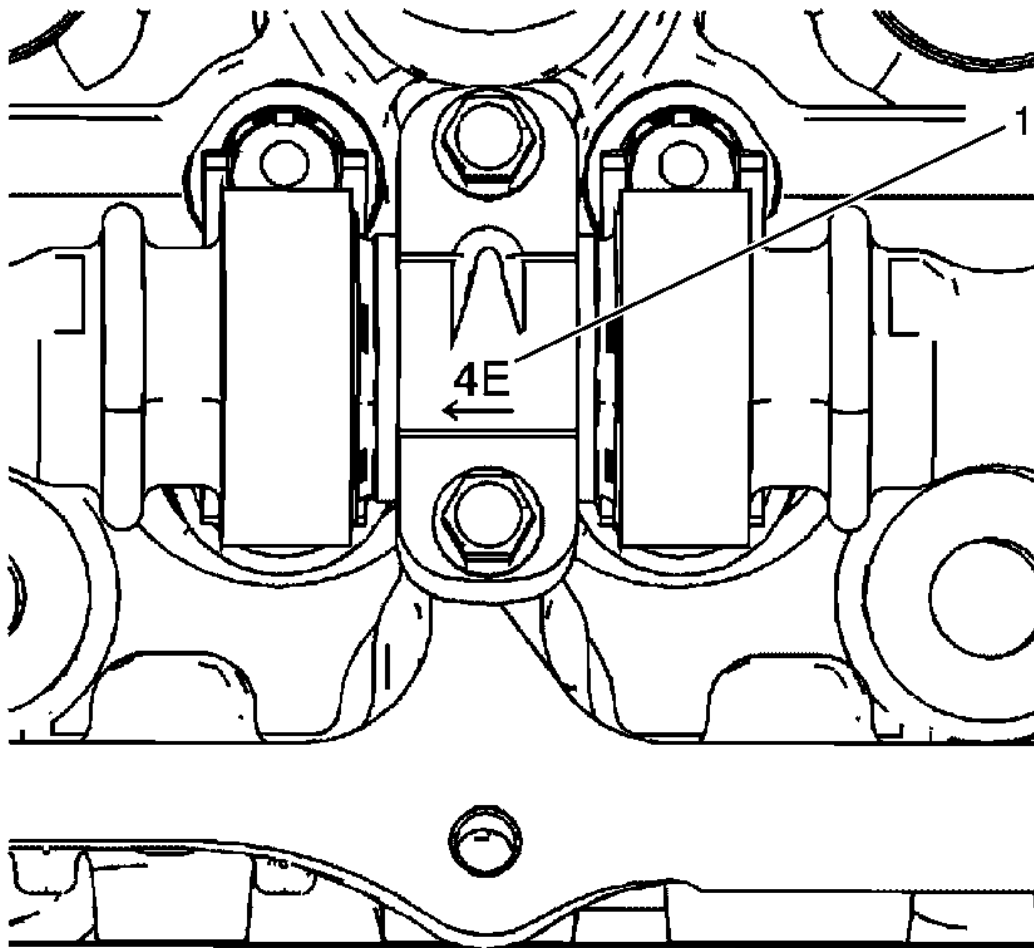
Identifying Left Cylinder Head & Camshafts
